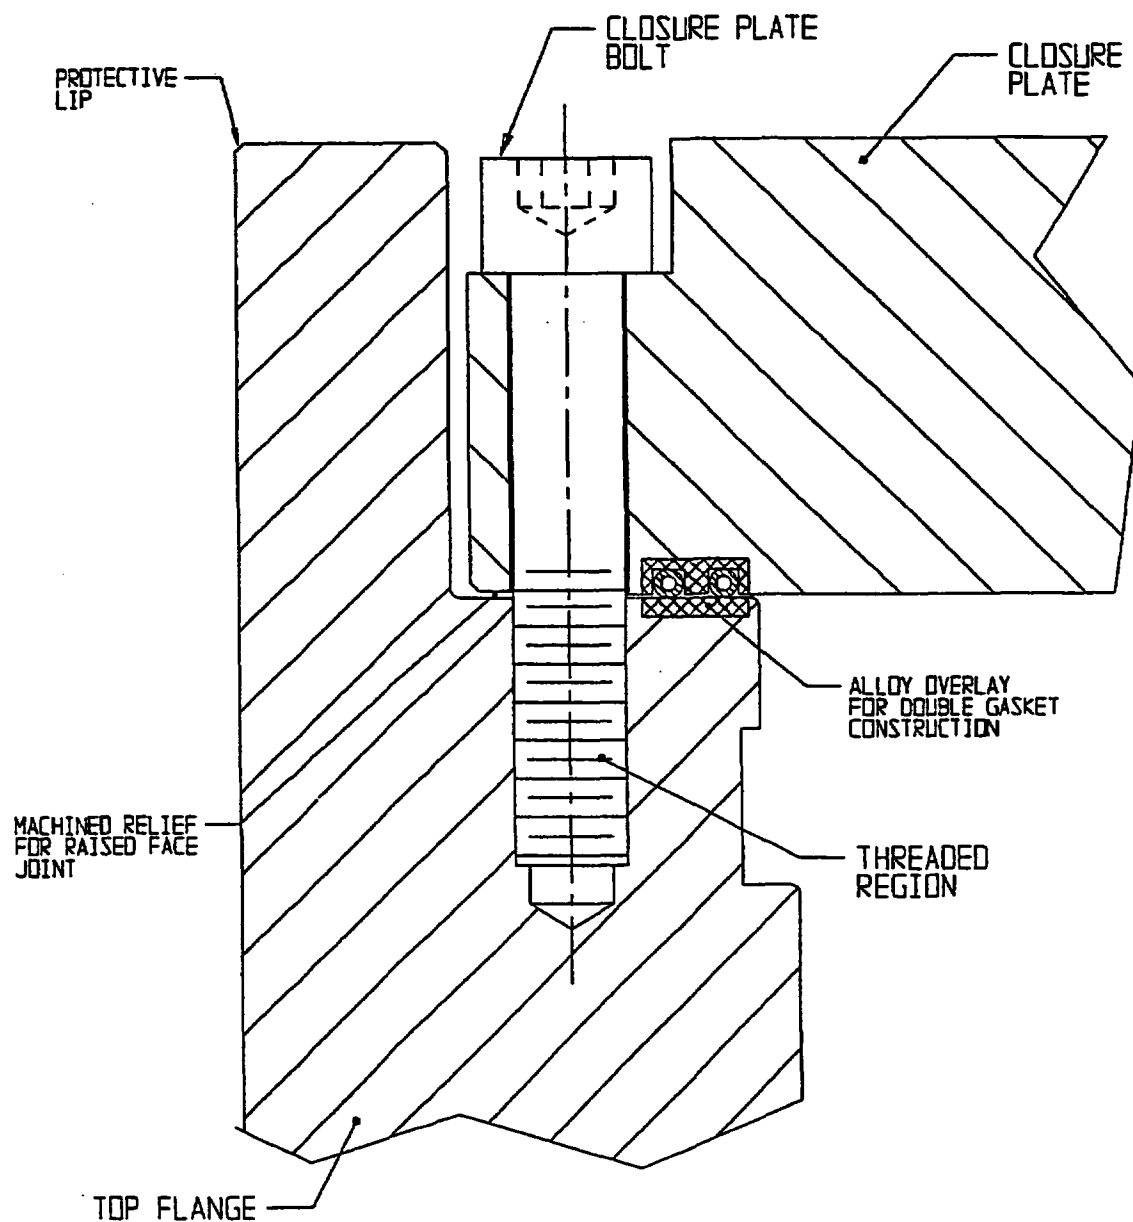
; SCHEMATIC OF CLOSURE PLATE BOLTED JOINT
